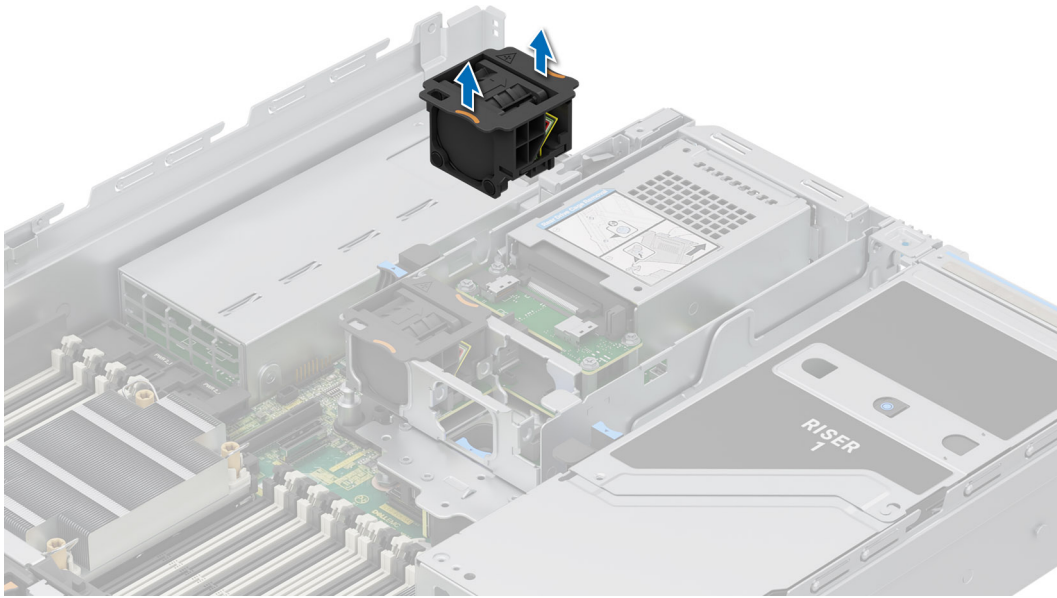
Removing a 2 x 2.5-inch rear drive module cooling fan
